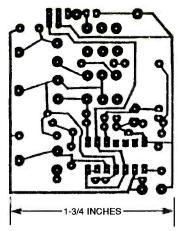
If you'd like to build the Adapter on a PC board, use this foil pattern to etch your own.
